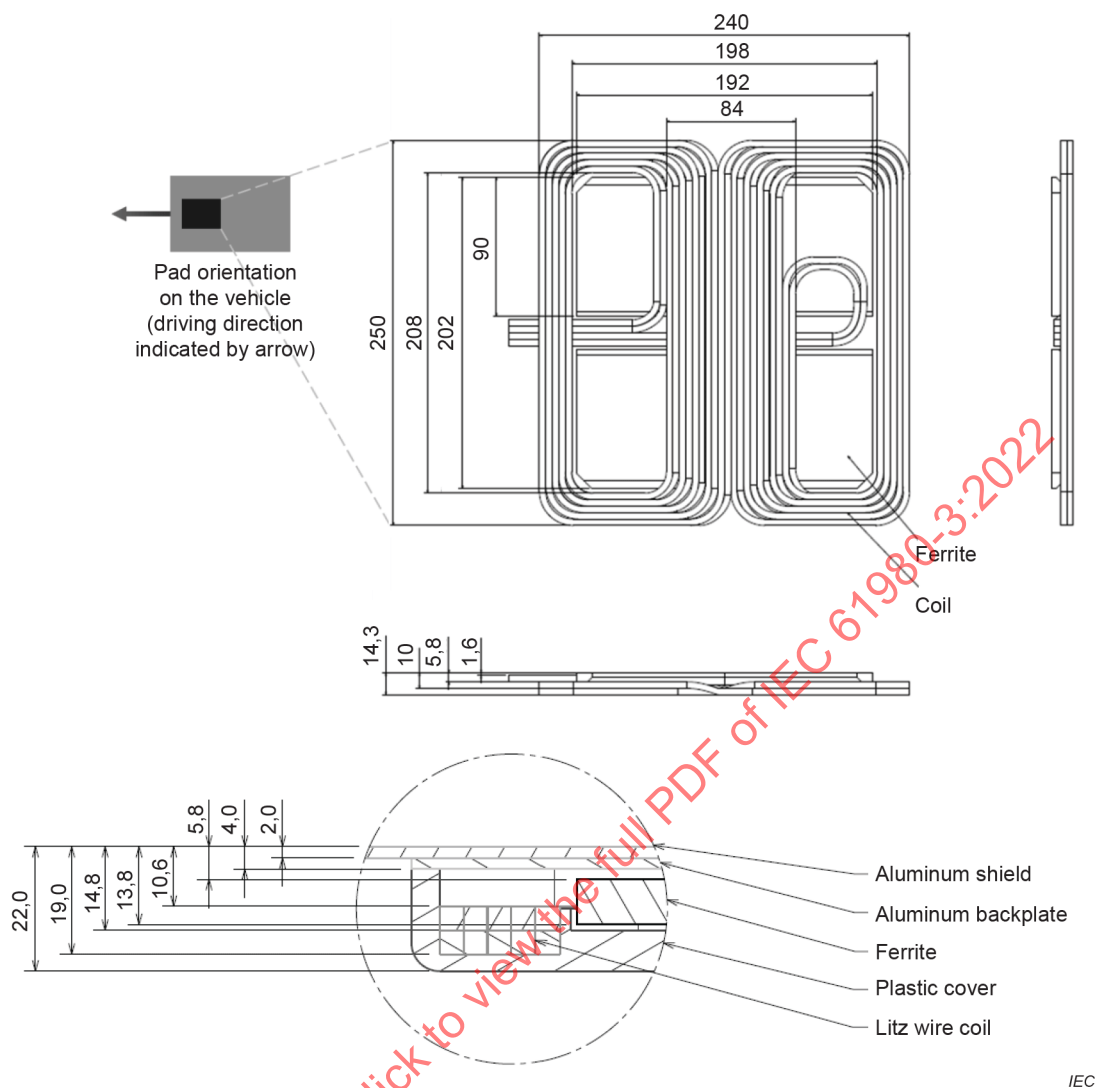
Mechanical dimensions of the MF-WPT2/Z1 DD secondary device
